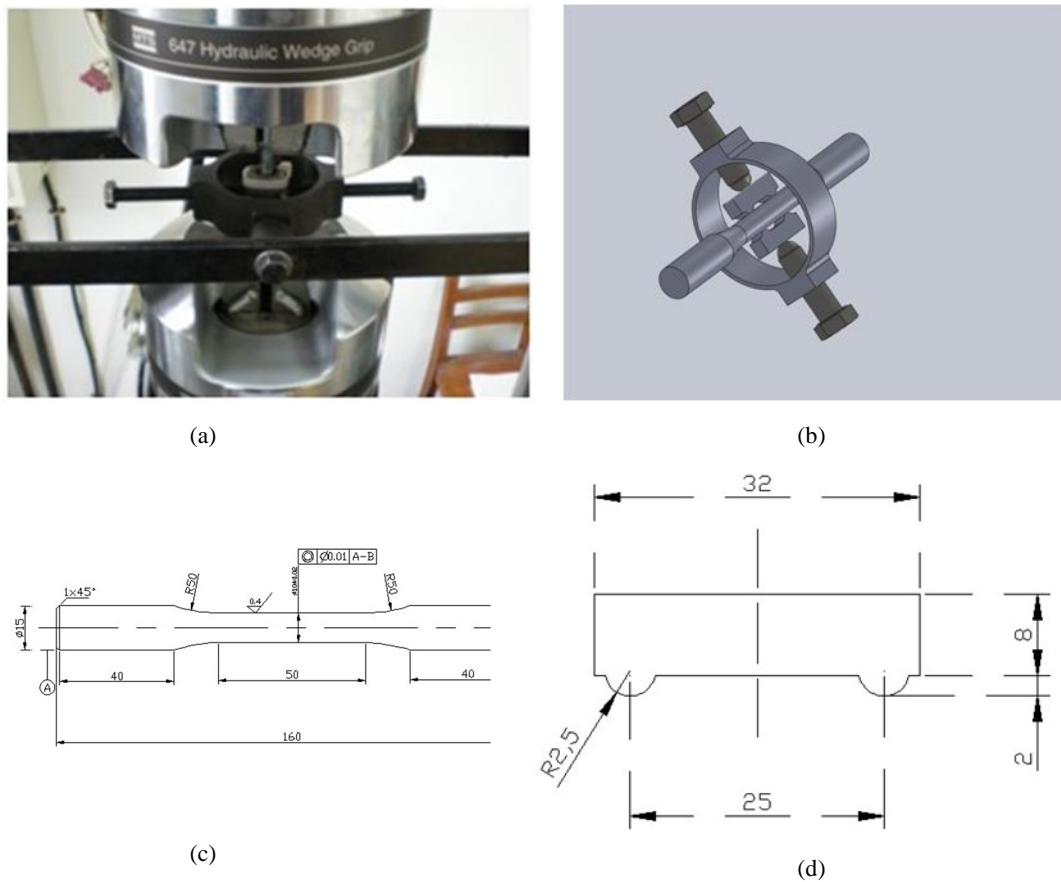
System and specimen for fretting fatigue test (a) The MTS 809 system, (b) Configuration for test, (c) Smooth specimen for fretting fatigue test, unit:mm, (d) Pad for fretting fatigue test, unit:mm
